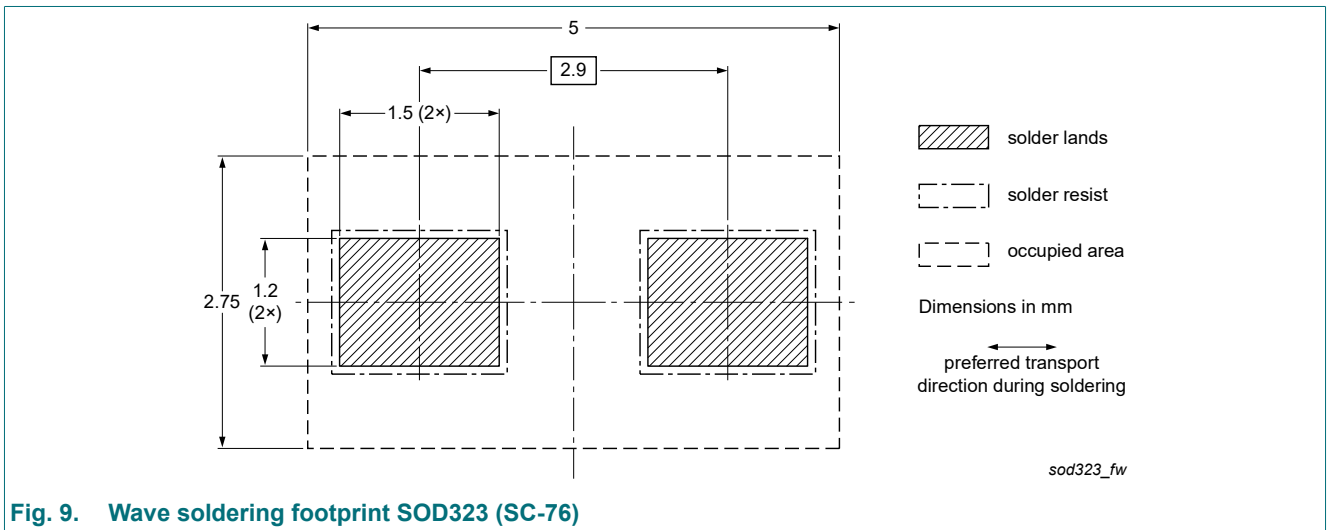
Wave soldering footprint SOD323 (SC-76)
